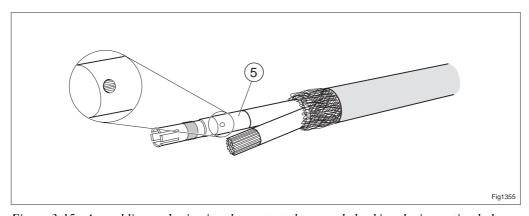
Assembling and crimping the contact sleeve and checking the inspection hole.
